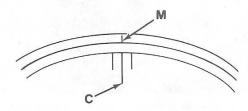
Center (C) flywheel timing mark must align with stationary mark (M) on stator plate when piston is positioned as specified in text.
